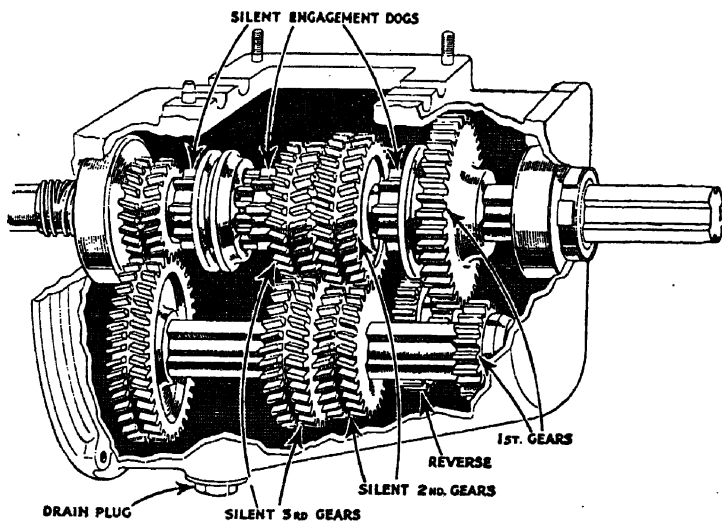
Four-Speed Gear Box with Pairs of Helical Gear Wheels for Quiet Operation and to Balance End Thrusts (Rover).
